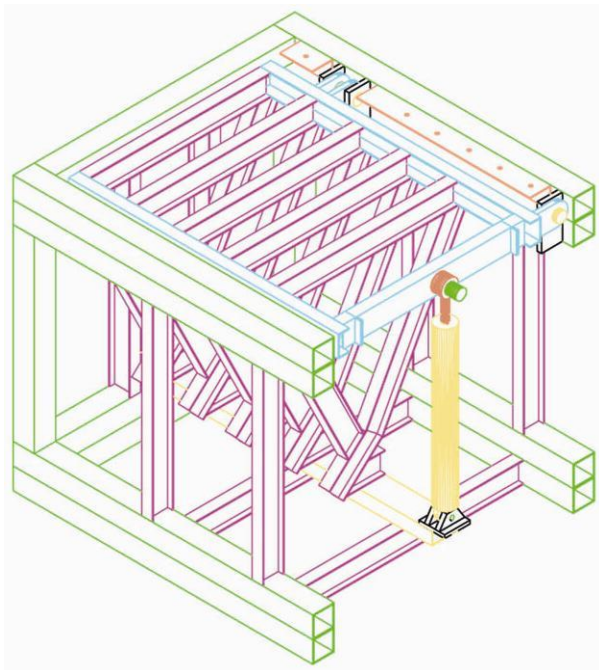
(a) Sectional 3-D Construction View (Road Blocker lowered)
